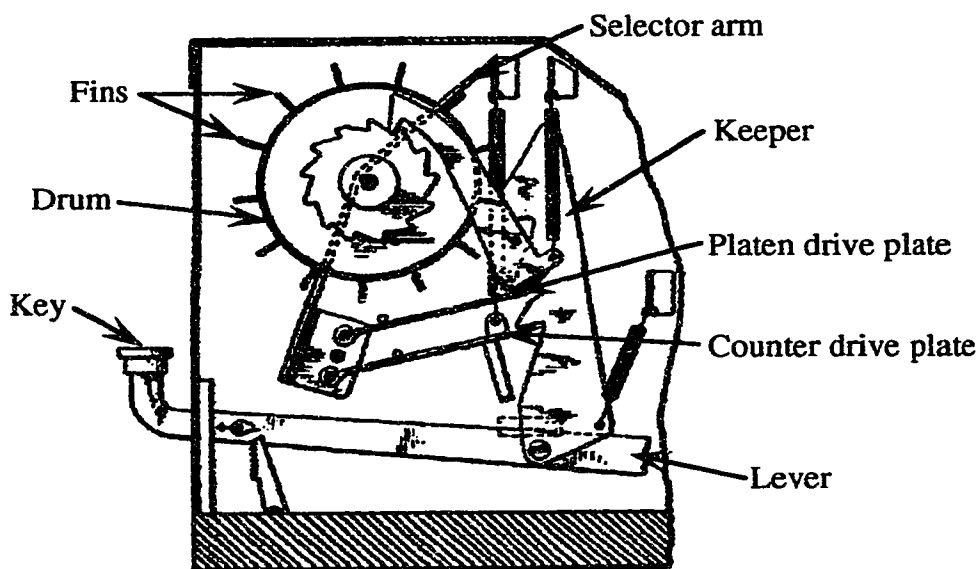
Cross-sectional view of Pressey's machine of 1926 in testing mode
